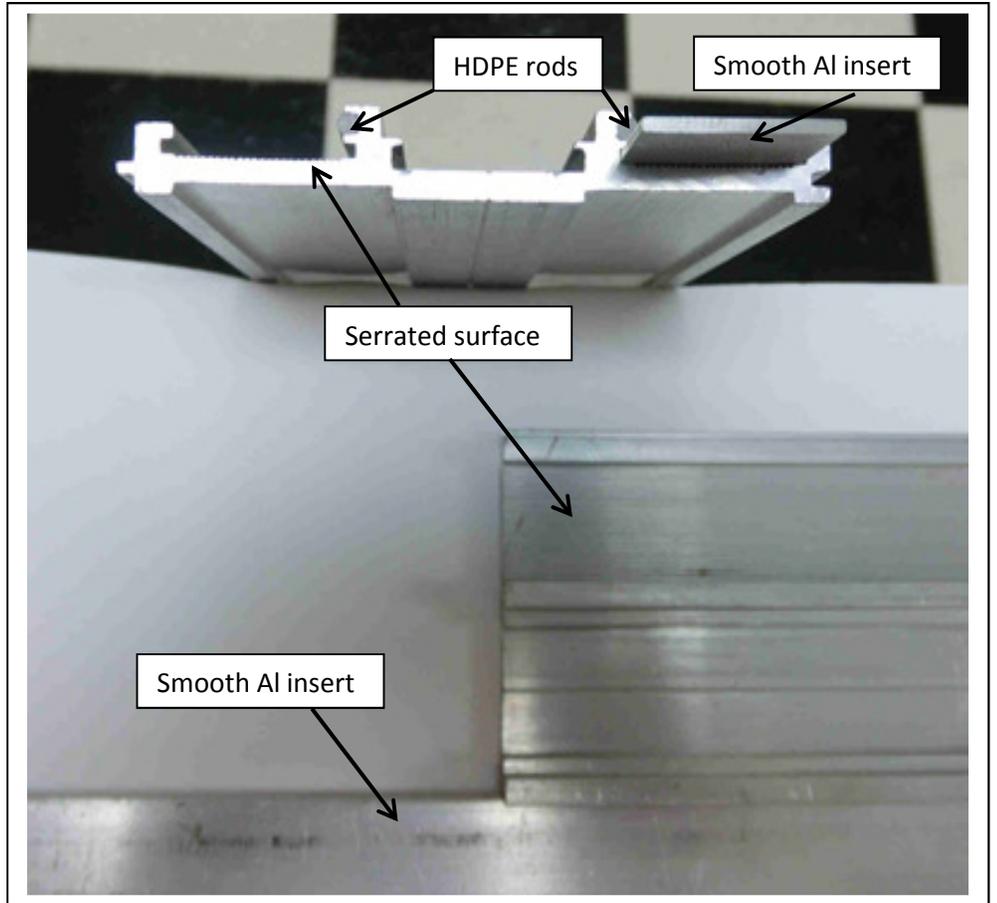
Showing HDPE welding rod being inserted into channels on the central guide strip of a 2 ft long lane piece used for testing. The main 2 lane track is in the top background.
